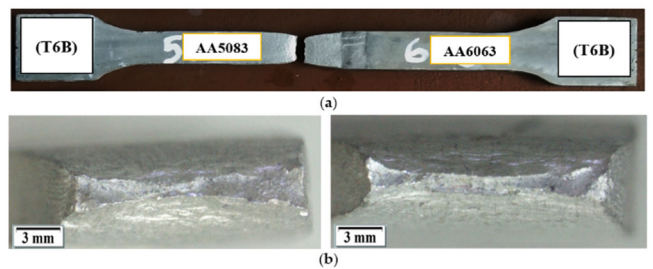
a) Fractured specimen T6B; b) Macrostructure of the fracture surface of T6B
